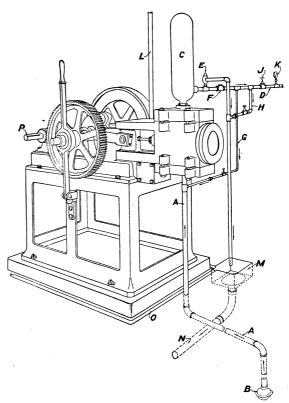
Pumping unit, consisting of a double-acting, suction-lift pump and 2-horsepower gasoline engine. A, 11-inch suction pipe; B, foot valve and strainer; C, air chamber; D, 1^1_1 -inch discharge pipe; E, relief valve; F, check valve; G, $\frac{1}{2}$ -inch charging or priming pipe; H, waste and blow-off pipe; J, gate valve; K, pressure gauge; L, engine exhaust above roof; M, sump in floor; N, 4-inch drain; O, floor gutter; P, shaft for attaching pulley to drive other machinery. An equipment having a rated capacity of about 17 gallons a minute and erected complete, as shown, at a point 500 miles from the factory, costs approximately \$300. (March, 1918.)
